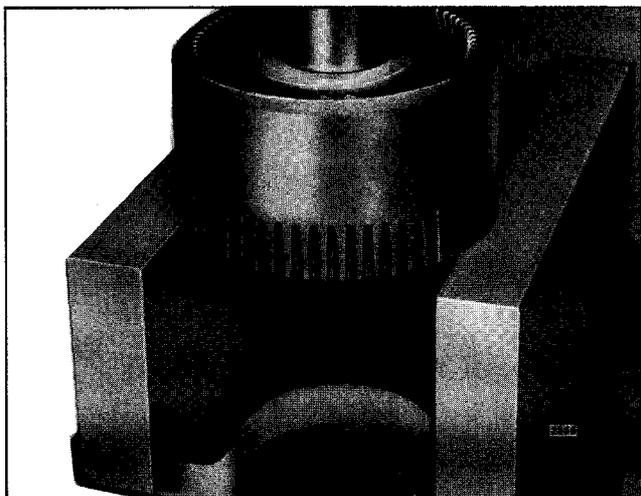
Removing Forward Clutch Piston and Cylinder Assembly from Ring Gear
